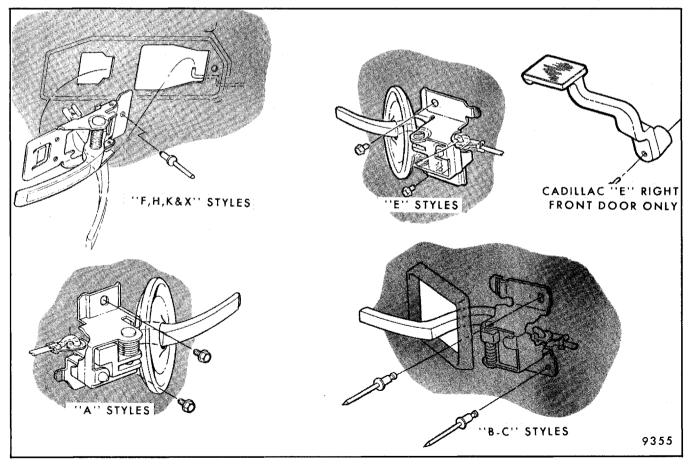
Typical Door Lock Remote Control Handle and Cover Plate Installations
